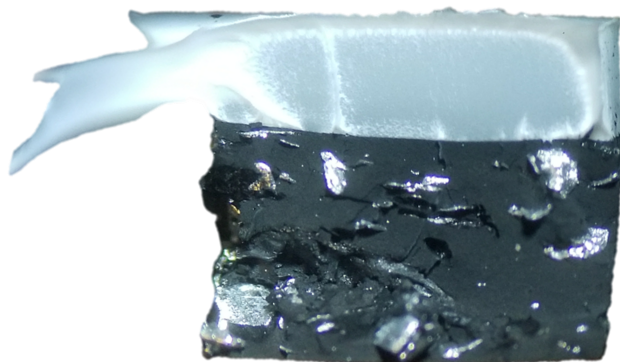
Fracture surface of a bilayer tensile specimen with doped and neat polyethylene layers.
